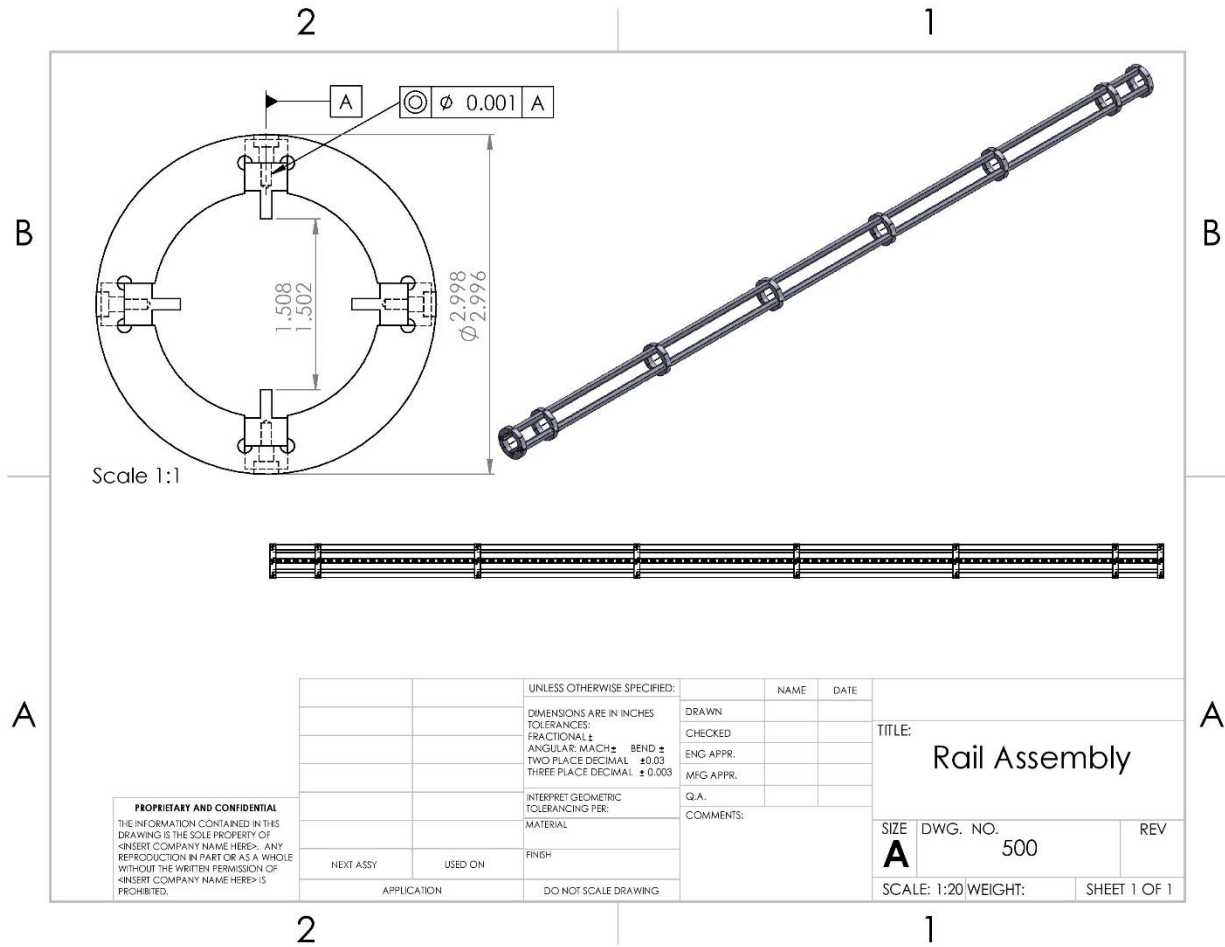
8: Railed-Tube insert Assembly Part Drawing
